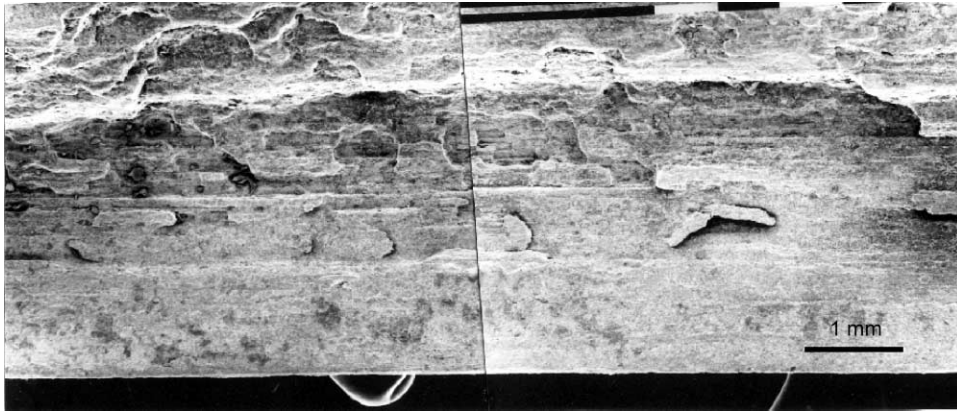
SEM fractography ($\times 10$), showing surfaces of fatigue crack and final fracture.
